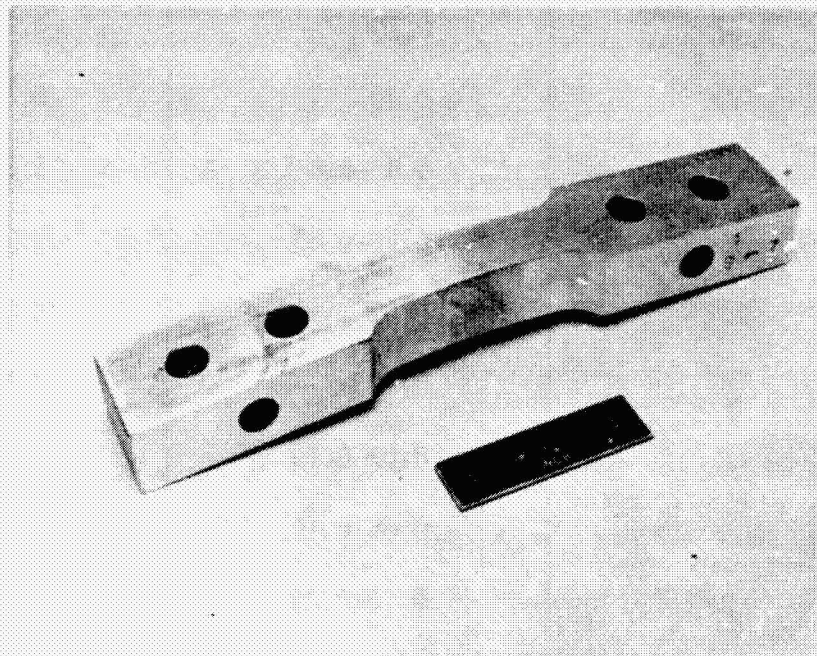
Specimen configuration of a 1-in. (2.54 cm) thick plate weldment (weld bead reinforcement removed and faired).
